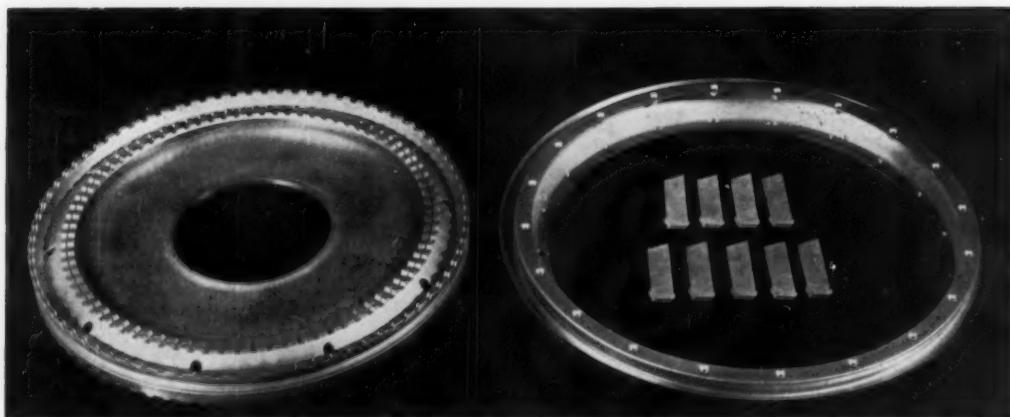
Typical AM 355 Compressor Parts for Gas Engines Include a Disk (Left), a Spacer (Right) and Blades Within the Spacer
